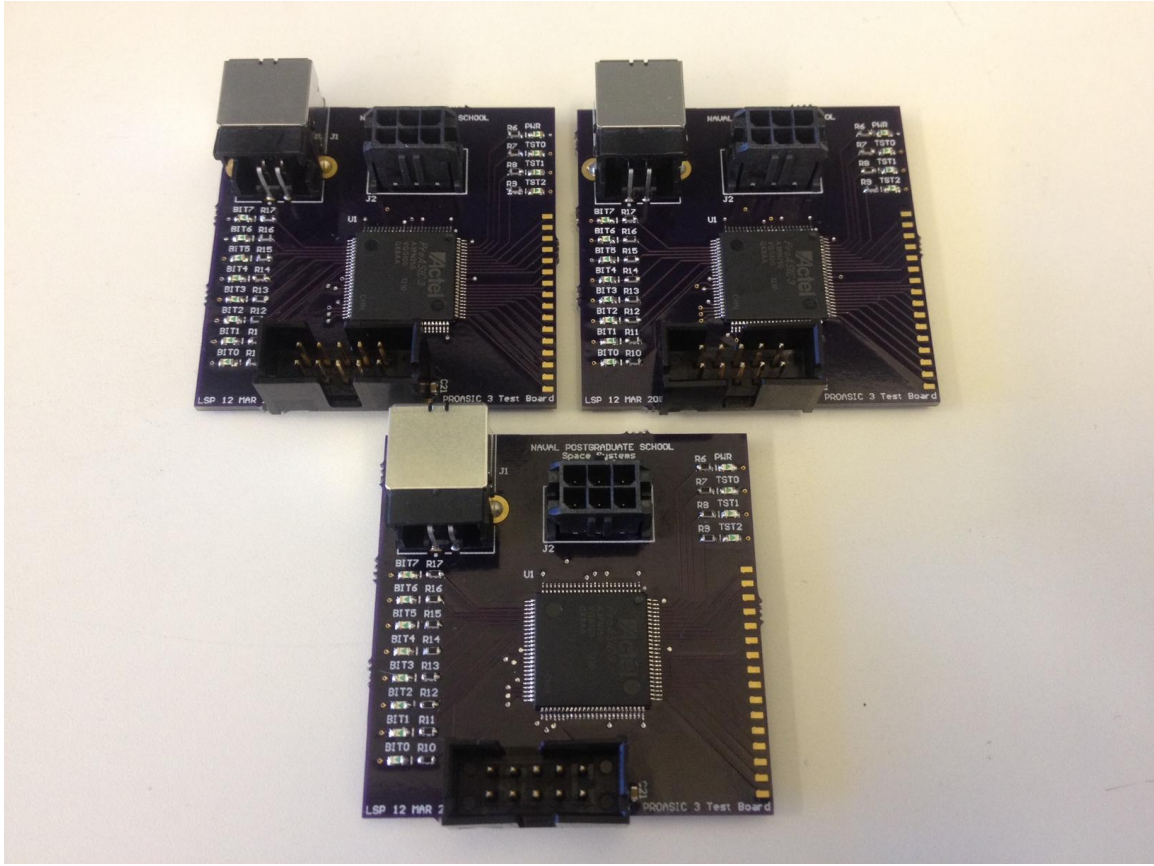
All three ProASIC3 Test Boards soldered and integrated—ready for testing.
